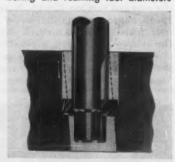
Core-Rector adjustable cutter for boring cored holes made by Muskegon Tool Industries, Inc.
